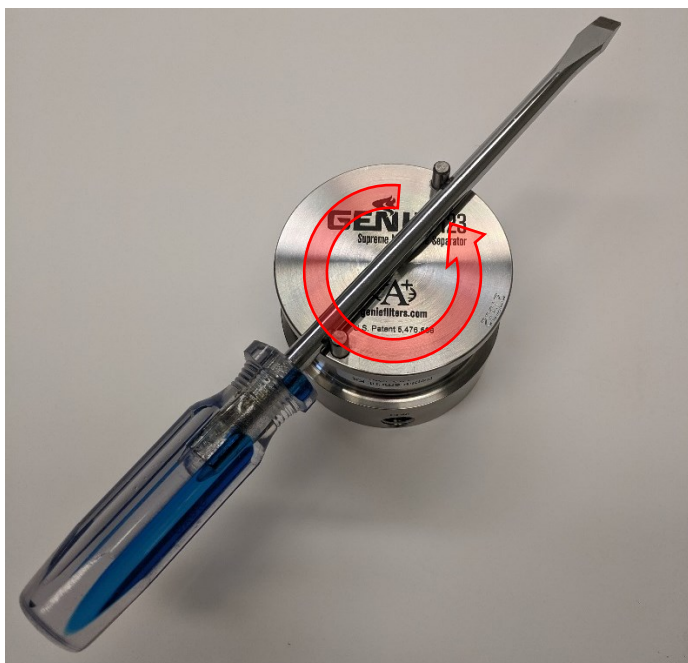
Unscrewing Liquid Membrane Separator Cover with Assistance
